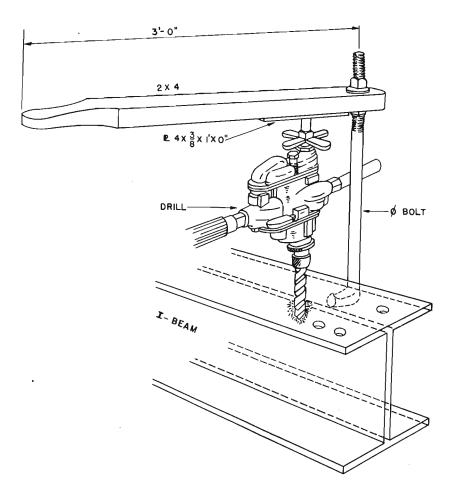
Drill bar used with pneumatic drill. The drill bar is less stable than the "old man" shown in figure 50.
